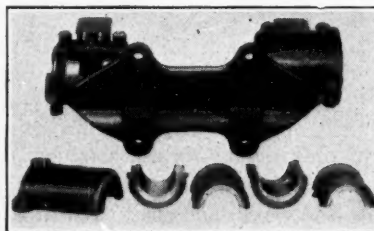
DETAILS OF BACK-GEAR BRACKET
